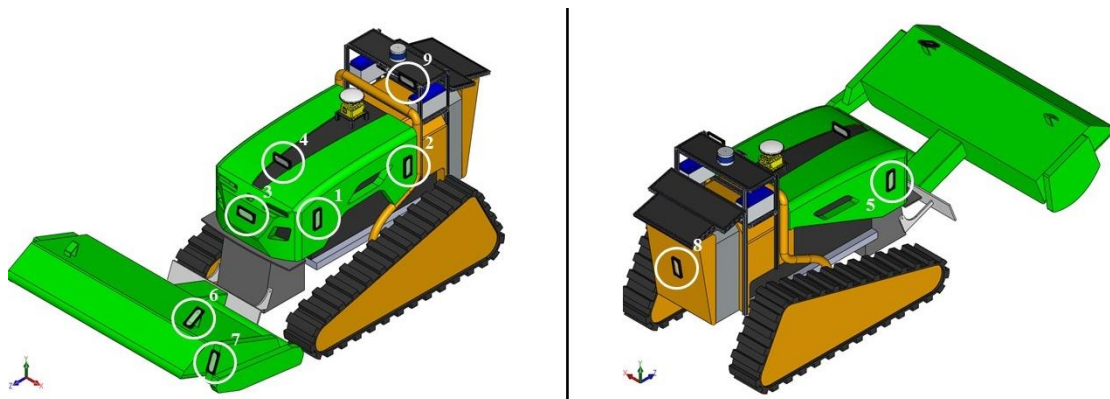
Positioning of the glass panels mounted throughout the machine
